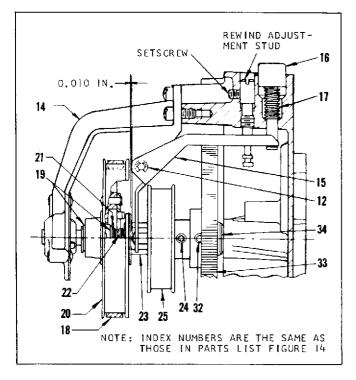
Figure C. Upper Sprocket Gear and Clutch Parts Assembled
